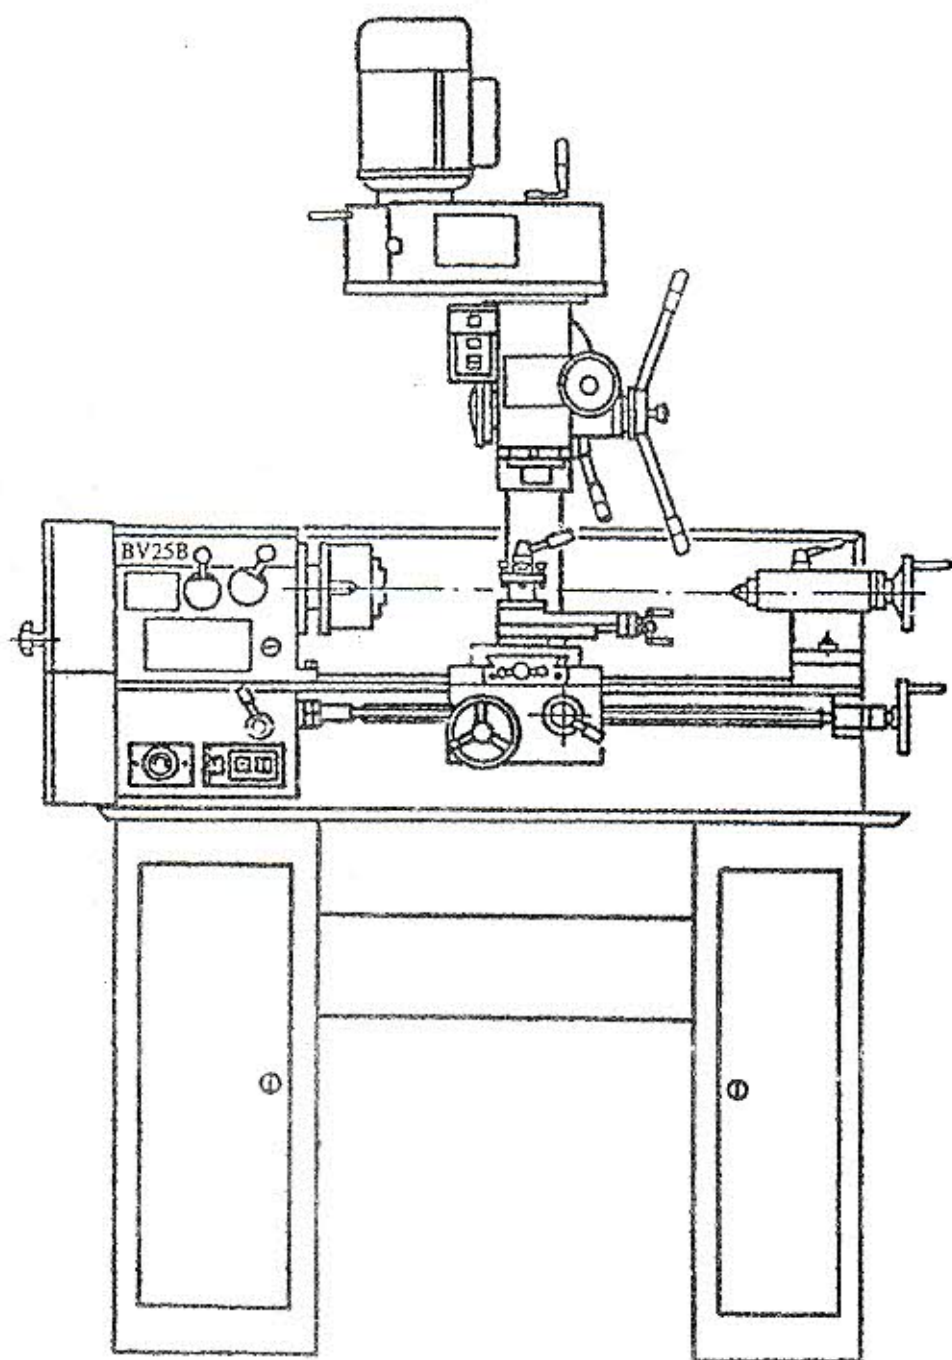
4 OUTLINE DRAWING OF BV25B - 4 BASE FRAME
